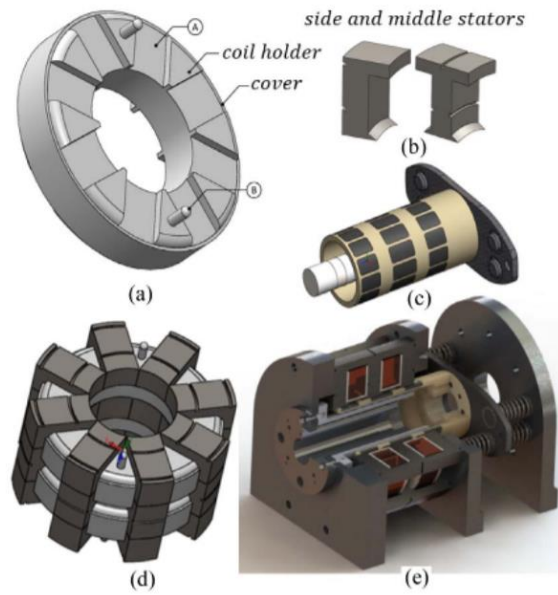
CAD models of the linear actuator components: (a) Coil assembly; (b) stator core; (c) mover assembly; (d) stator assembly; (e) linear actuator assembly. [55]
